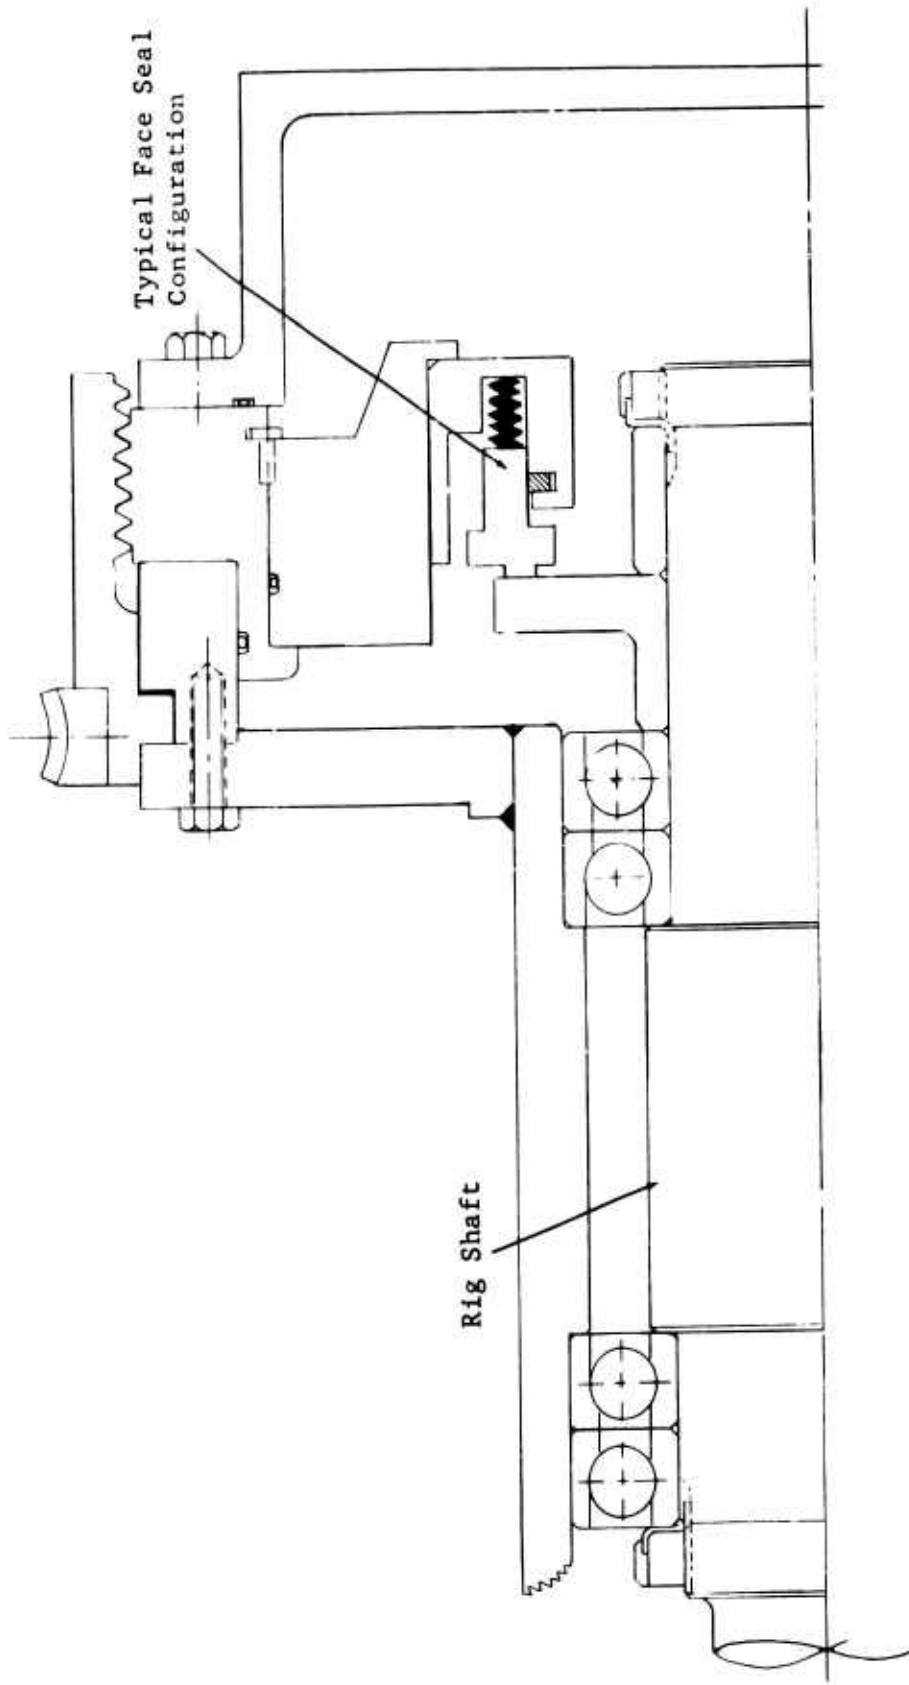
Rotating Seal Rig Test Head With Carbon-Face Seal Installed.
